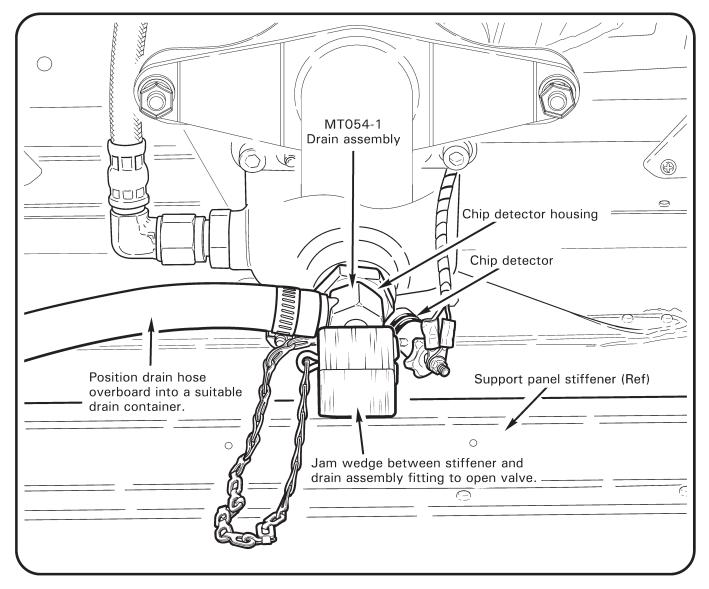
DRAINING MAIN ROTOR GEARBOX OIL
